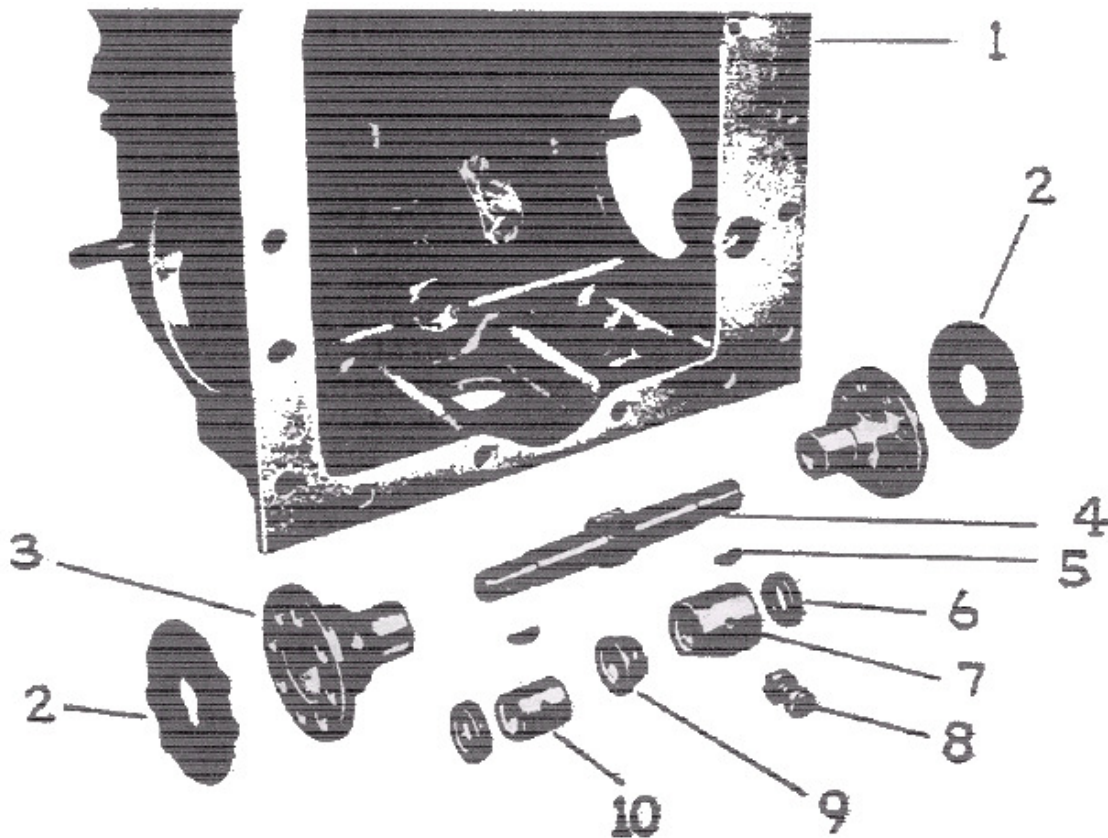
Propeller Shaft Housing and Exploded View of Magneto Drive
